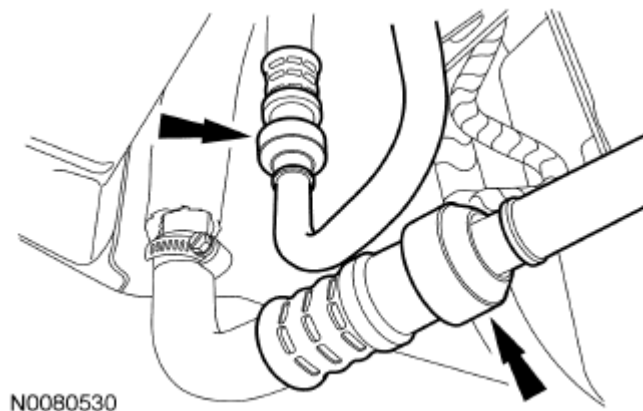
Locating Transaxle Fluid Cooler Tubes
